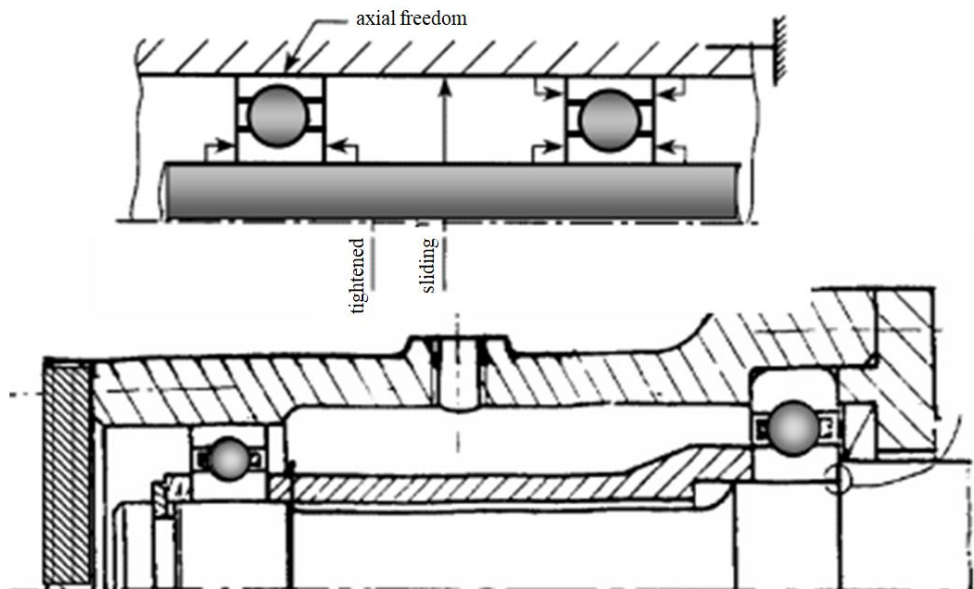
13: Mounting of a rotating shaft and fixed housing.
